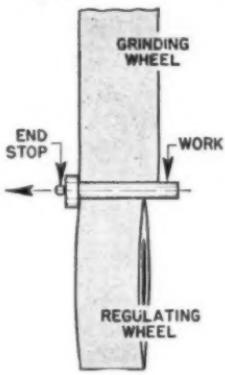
Top view sketch of combination infeed and thru feed set-up.
